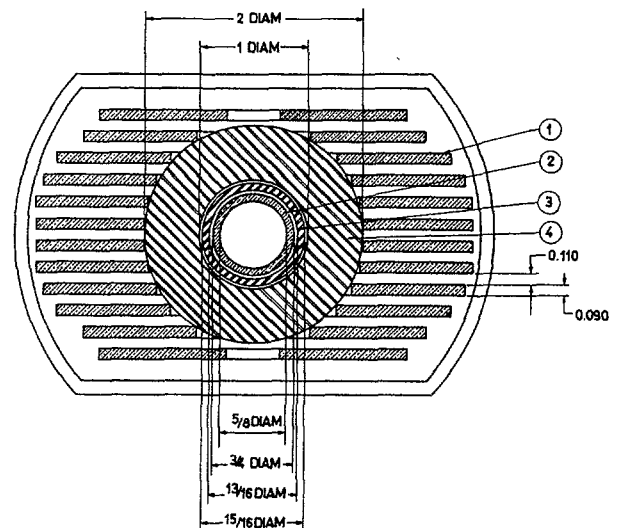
Cross-sectional view of an early model test duct. All dimensions given in inches. 1—copper winding, 2—copper vacuum liner, 3—hipernik, 4—hiperco.
